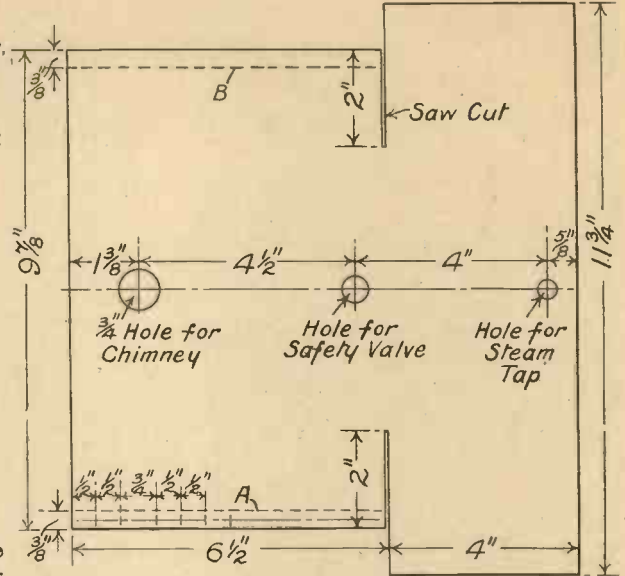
The sheet-metal plate for forming the outer boiler casing.
